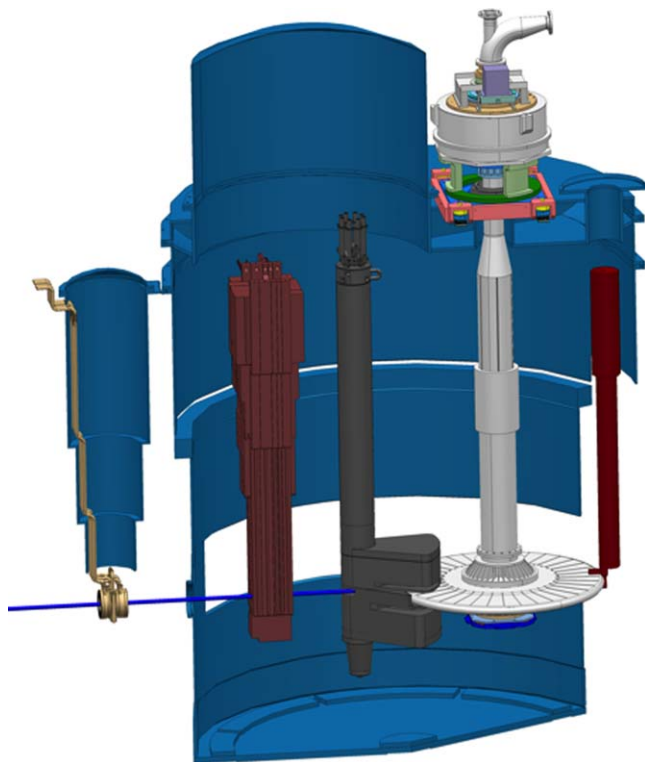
Target wheel drive and shaft in the monolith (shielding blocks excluded).
